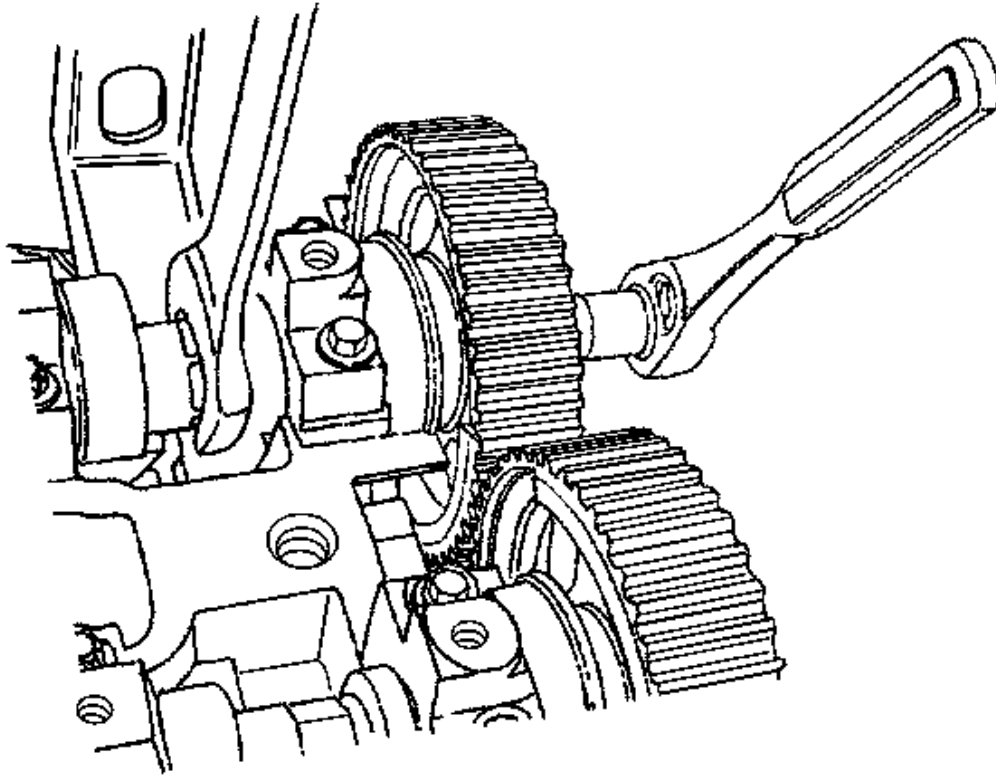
View Of Camshaft Gear Removal/Installation Procedure
